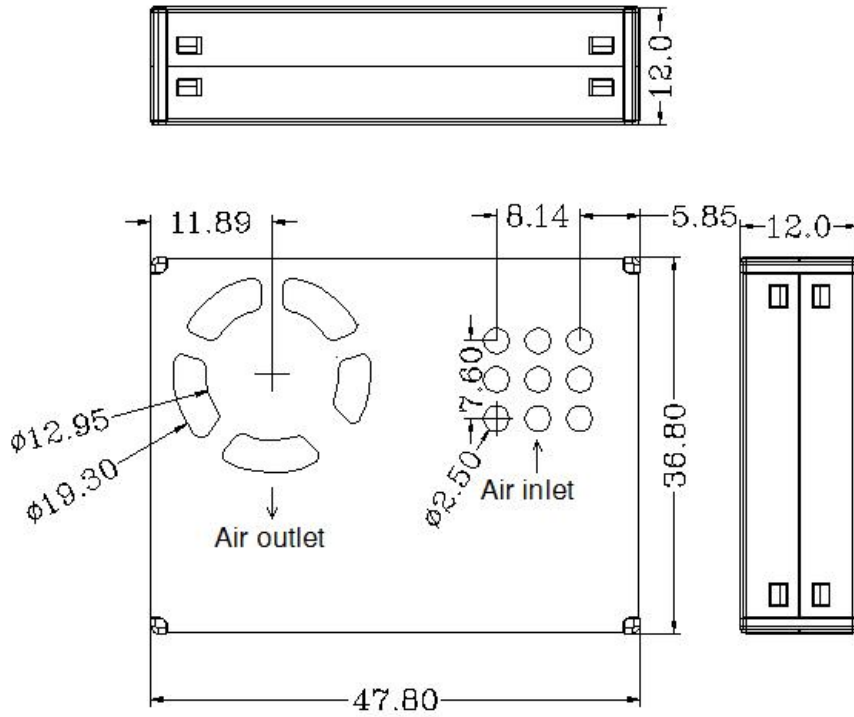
Overall dimensions (unit: mm, error ± 0.2 mm)
